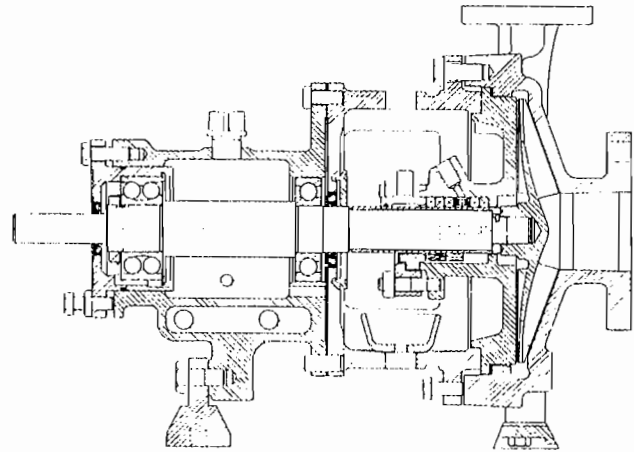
ANSI Pump (Courtesy Goulds Pumps, Inc.).
